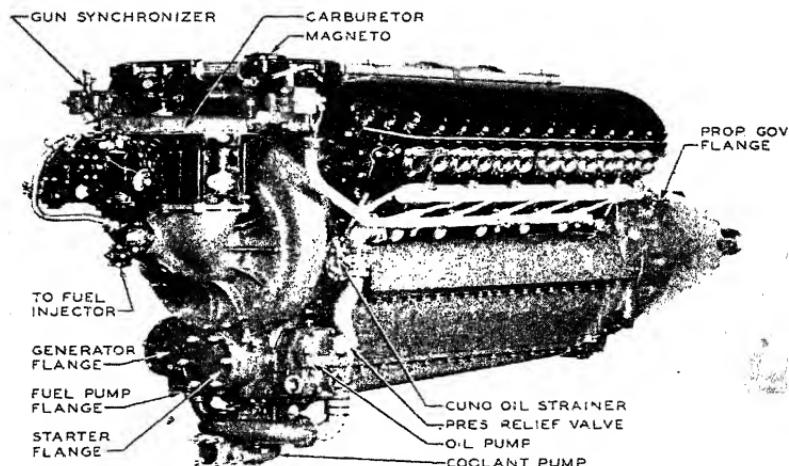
Right side of Allison V-1710 engine, showing location of accessories.
